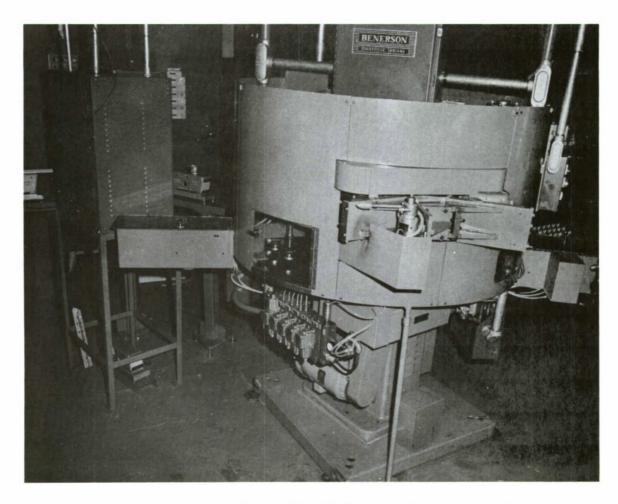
Escapement Assembly 100 Percent Spin Test Machine
